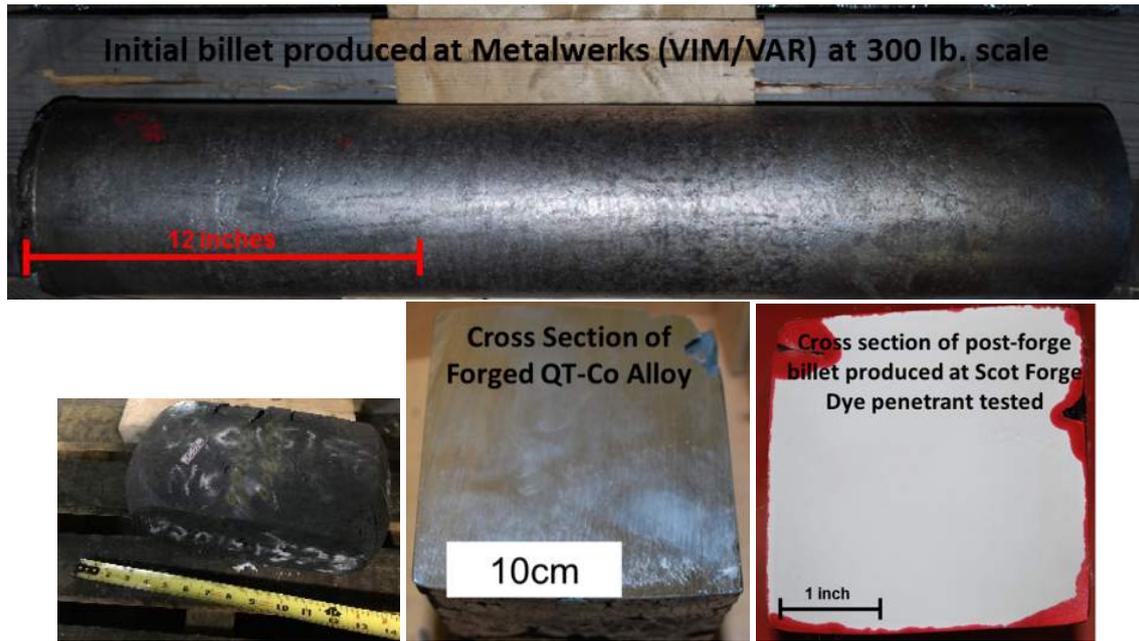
QT-Co alloy prior to forging (upper), post forging (lower left); cross-sectioned (middle); and (right) dye penetrant tested to ensure crack-free core
